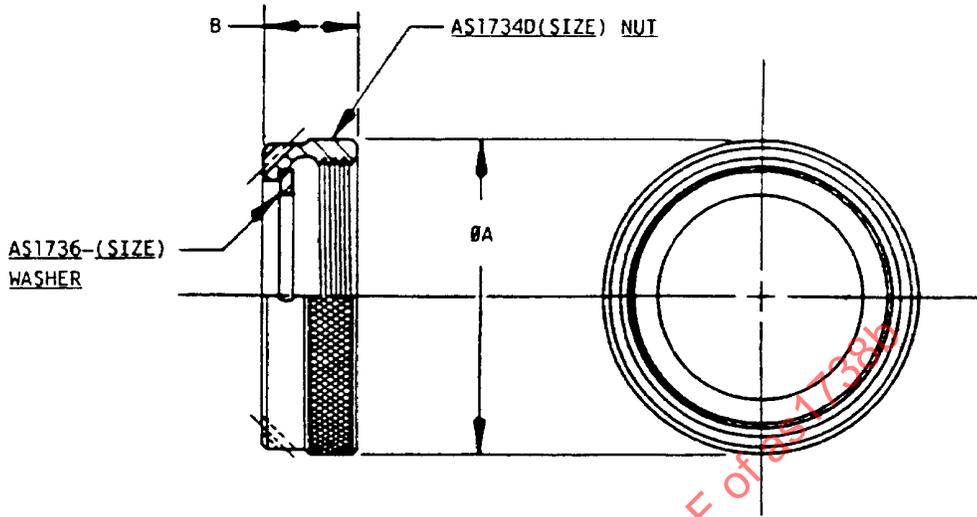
TYPE I COUPLING NUT ASSEMBLY
